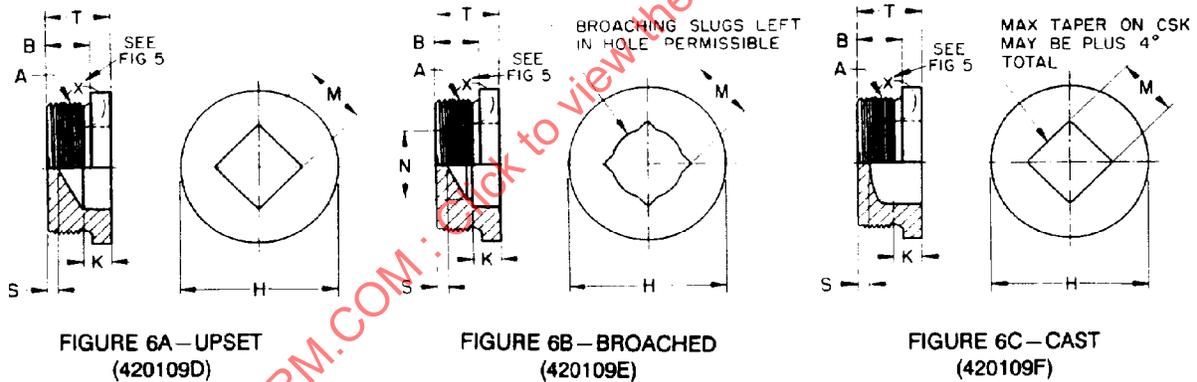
SQUARE SOCKET HEAD PLUGS
